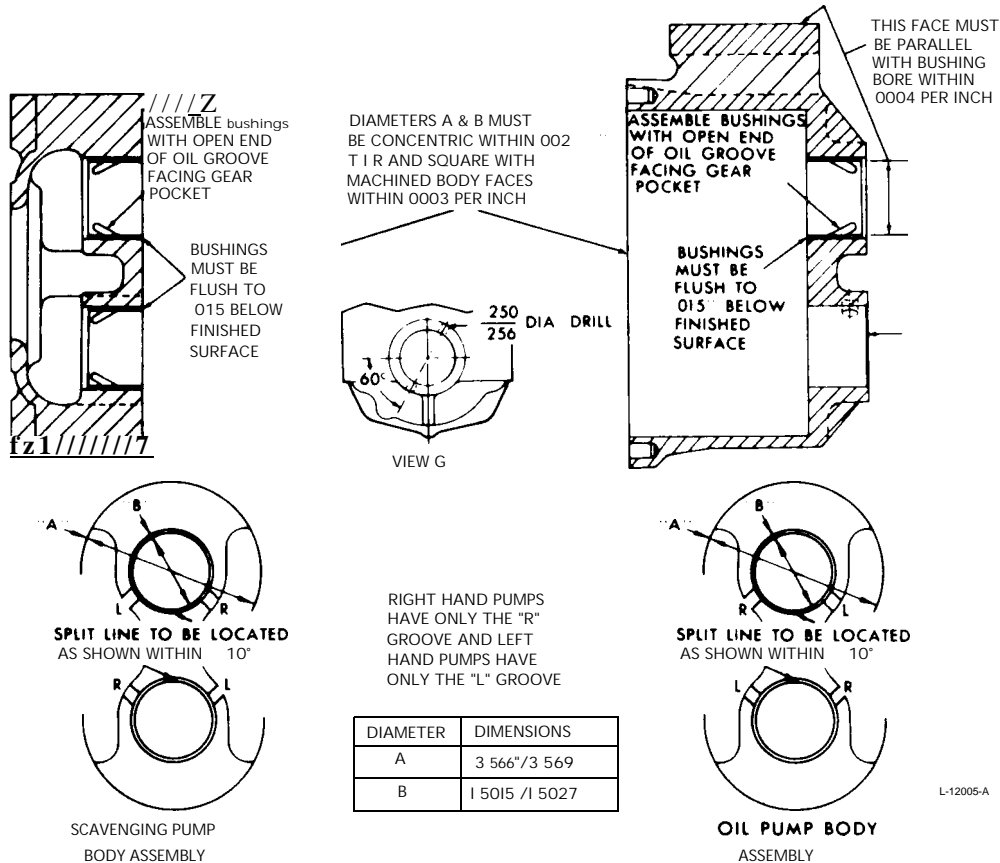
Location and Position of Oil Pump Bushings (1 2V and 1 6V Engines)
